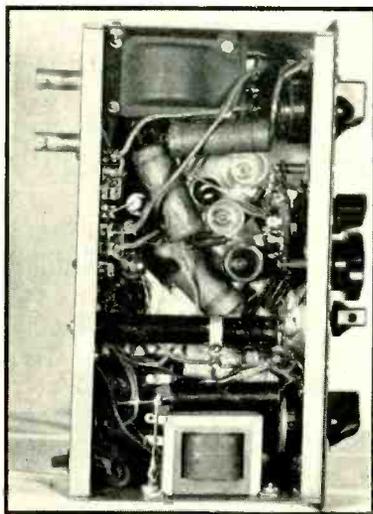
Underchassis view. The bleeder resistor is mounted away from the chassis on metal brackets. The filter choke is mounted under the power transformer with the filter condensers tucked on top. The audio transformer is mounted on the other end of the chassis.
